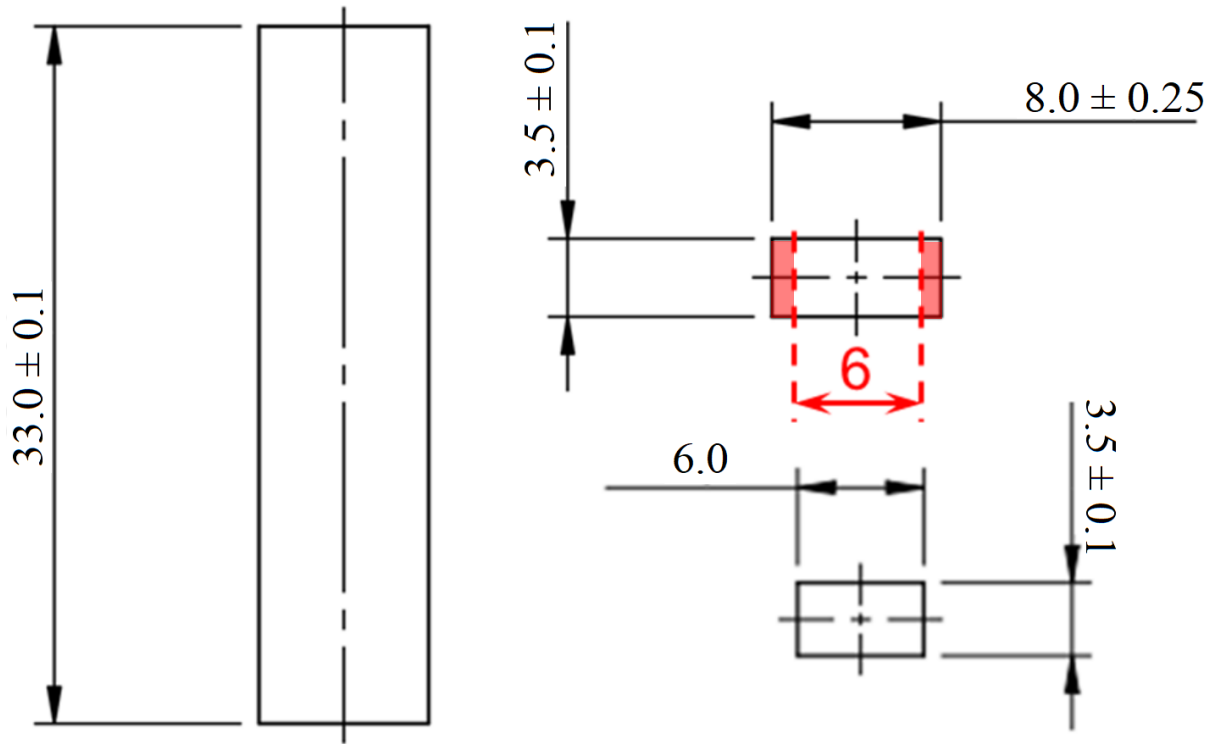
Schematic of the blanks for the tensile specimens, from which the sample blank specimens were cut; all dimensions are in mm. The residual material that became the sample blank specimens are highlighted in red, with approximate dimensions: 3.5 x 8.5 x 0.7 mm.
